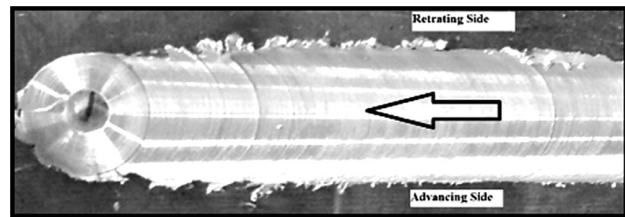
Friction-stir welded joint of AA6061-T₆
